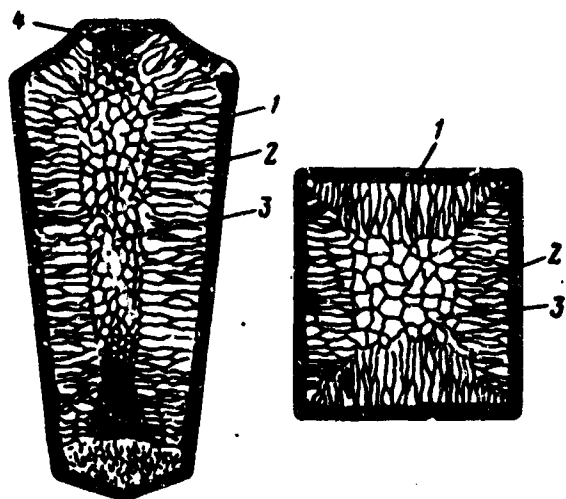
Diagrams of longitudinal and cross sections of an ingot.
